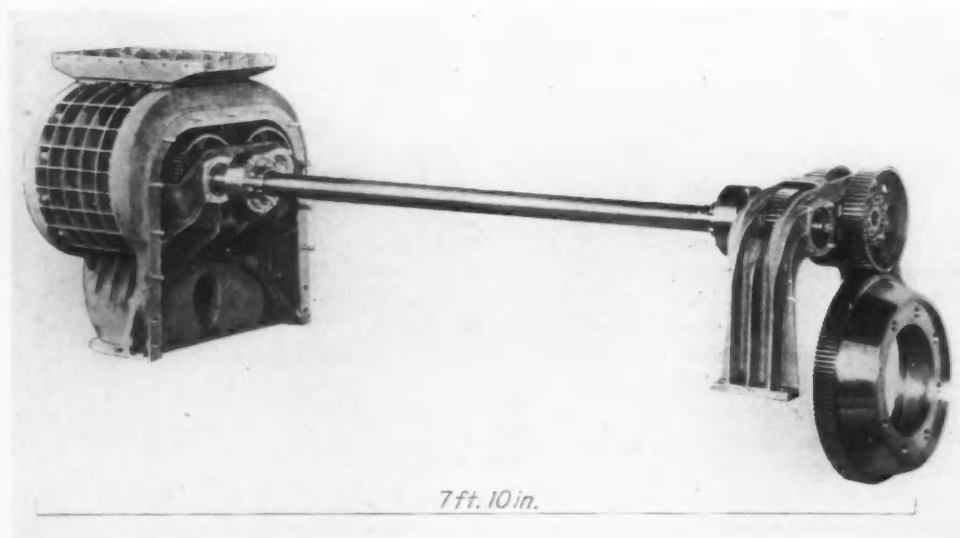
Large Supercharger and Drive Arrangement Built Recently for a 600-Hp. Two-Stroke Diesel-Engine
